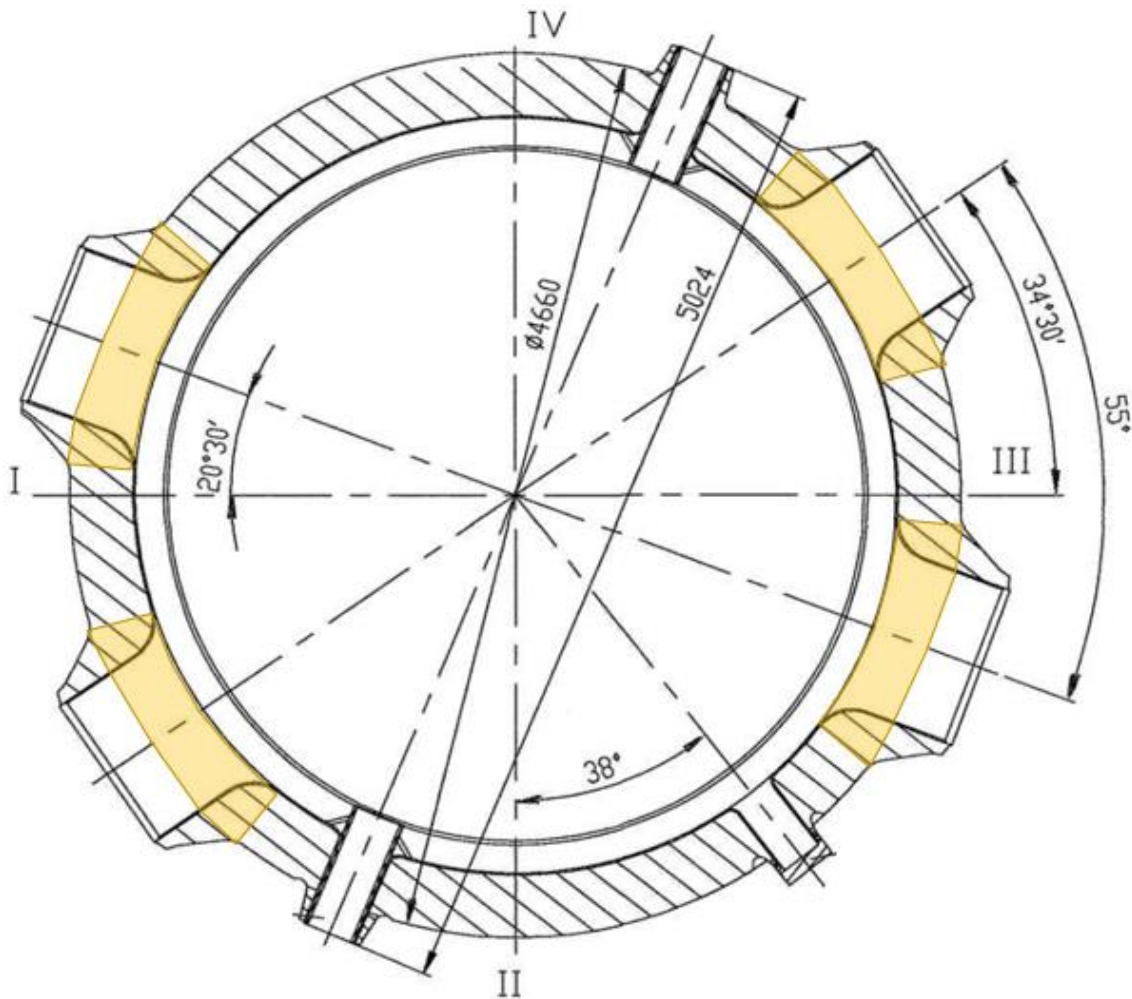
Sections of welds 4 and 5 for which examination is affected by DN850 inner radius areas. (adapted from drawing 1.4 Корпус (Поперечный разрез) retrieved 12.6.2020 <http://ar-thic.ru/vver1000/bezopas3.html>)
